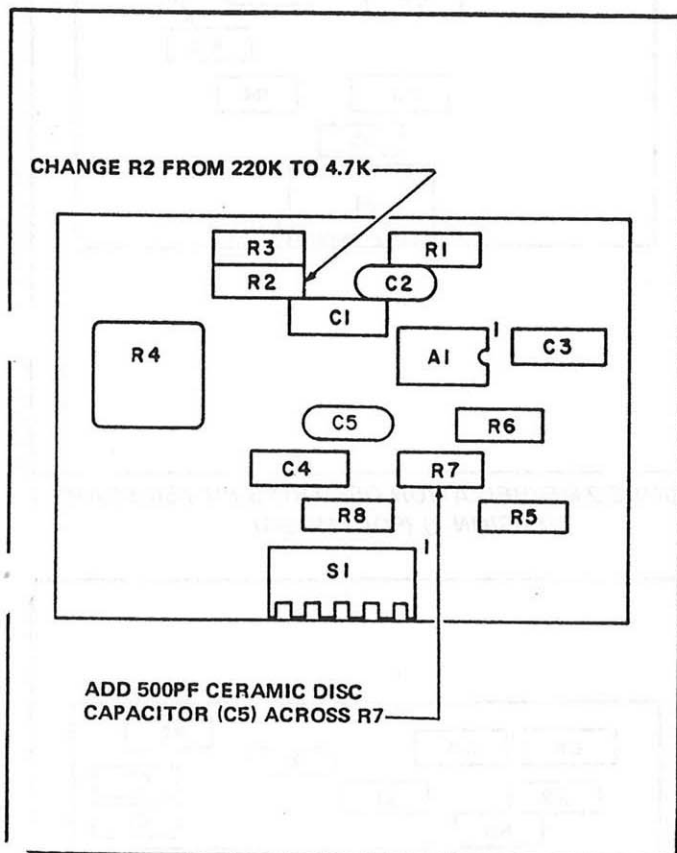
HARPSICHORD FILTER BOARD NO. 4
